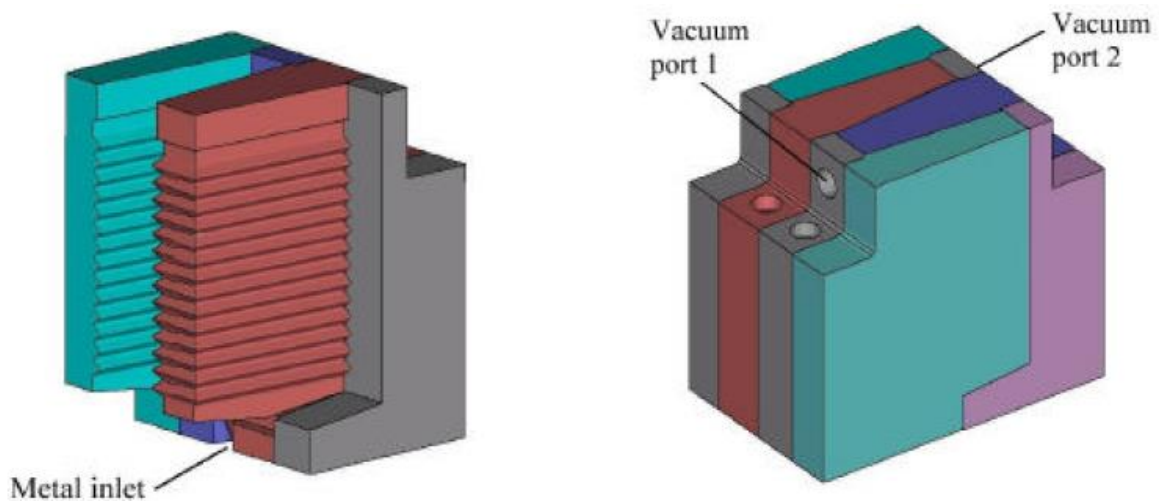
Left: Representation of one half, consisting of wedge-shaped inserts; Right: Engagement of two halves [100].
